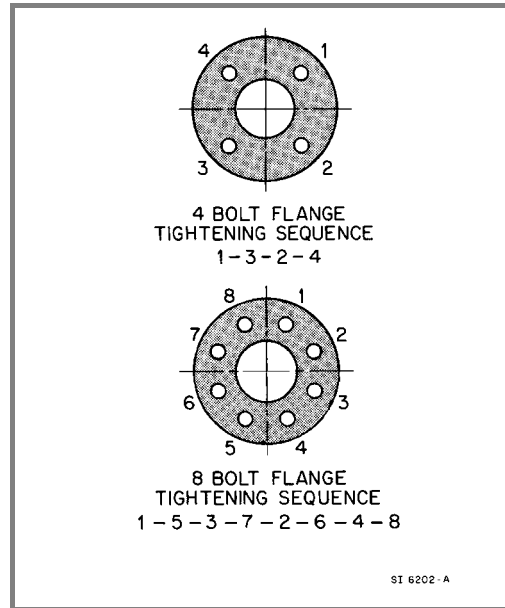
FLANGE BOLT TIGHTENING SEQUENCE
